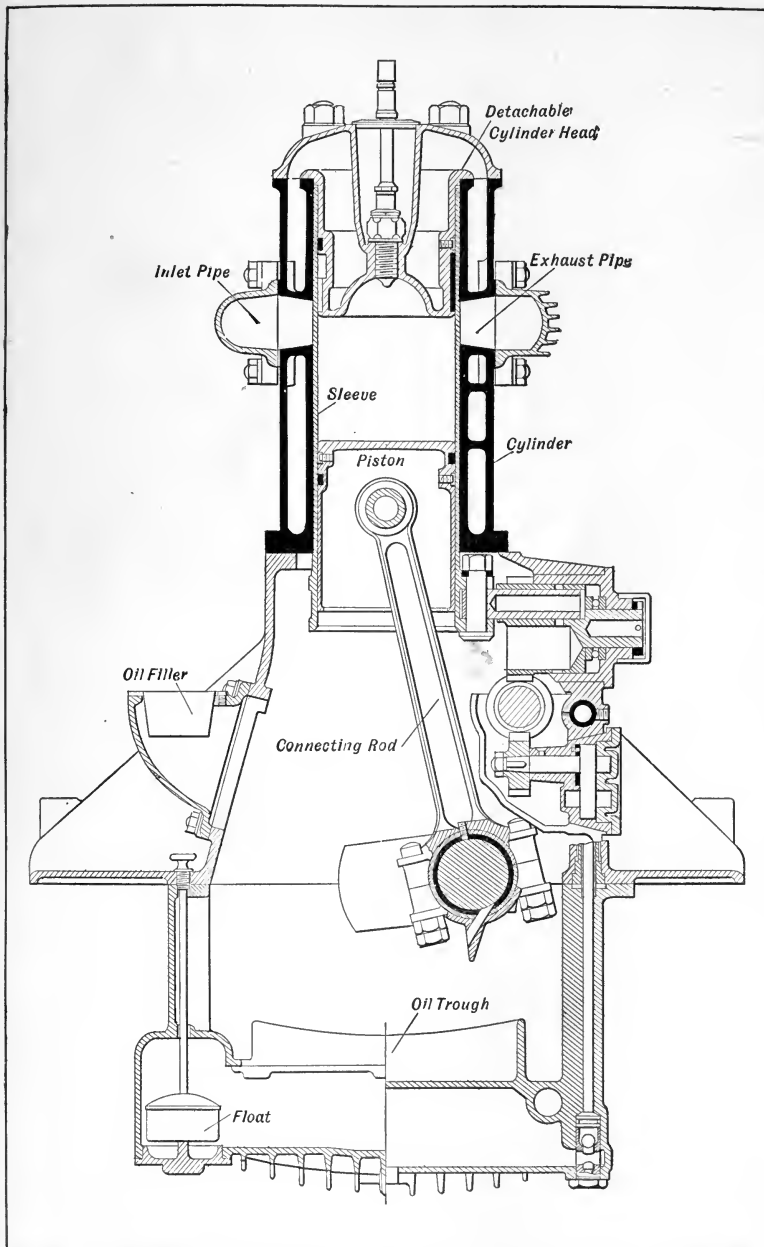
Showing Separate Head Construction of Argyl Sleeve Valve Motor,
